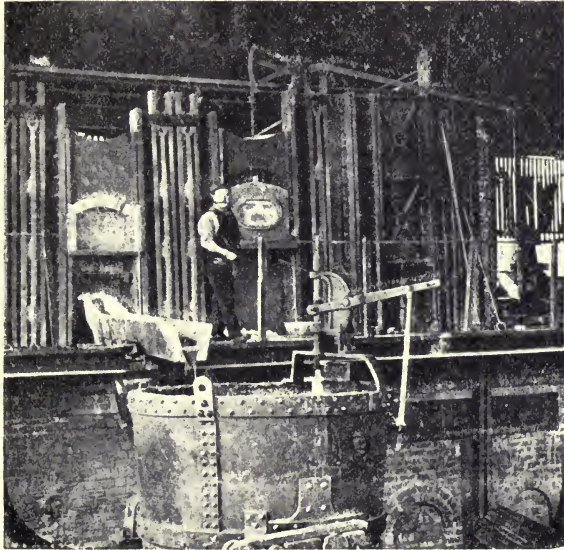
Back of Steel Furnace, showing Stays, Door, Tap Hole, and Metal Shoot.
